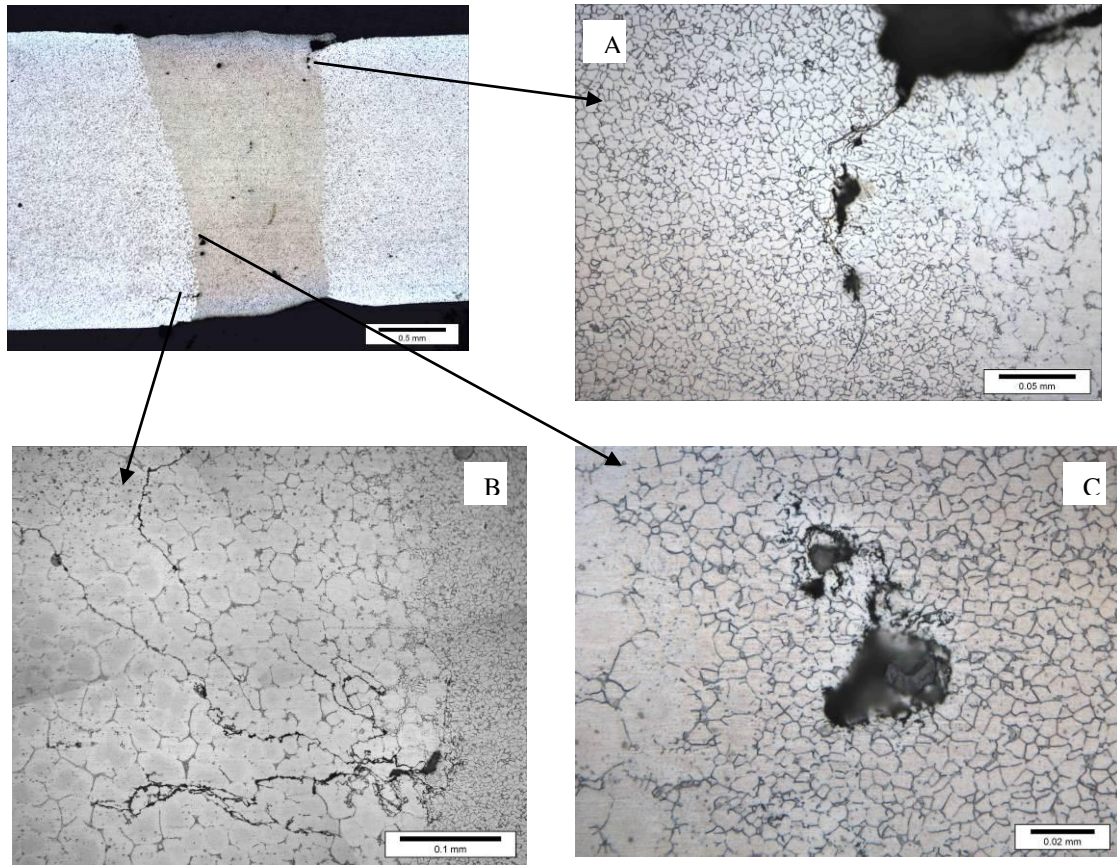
Solidification Cracks in the Sample Welded at 0.6 mm gap – End Section
